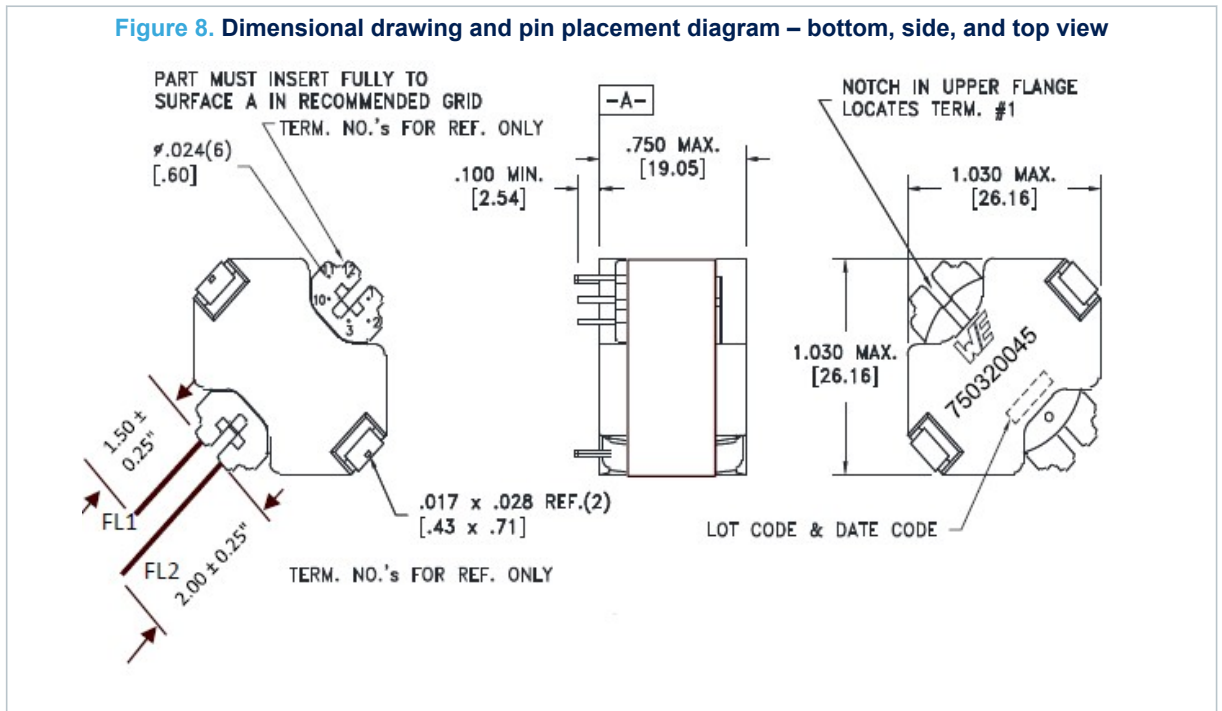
Dimensional drawing and pin placement diagram – bottom, side, and top view
